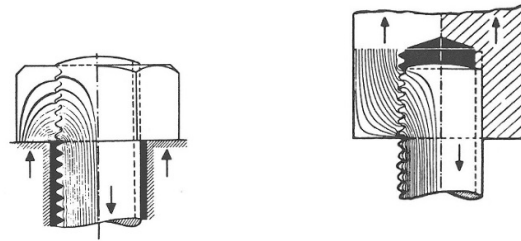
Stress concentrations in bolt and nut and bolt and turnbuckle type joints.
